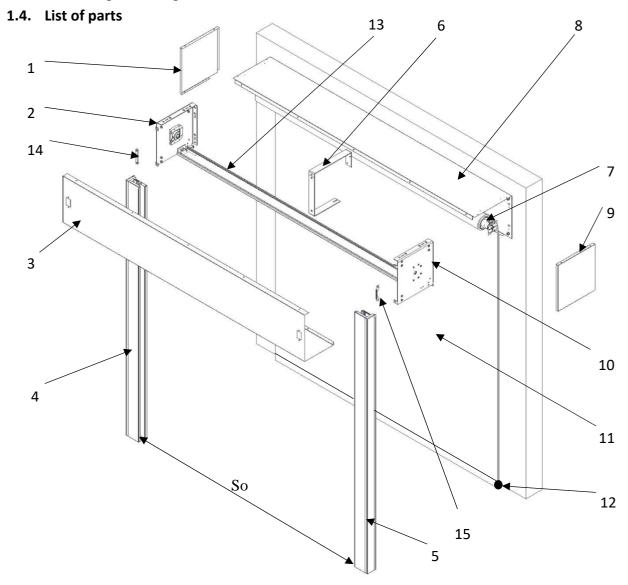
1 – Left-hand fascia cover; 2 – Left-hand shaft bracket; 3 – Front fascia cover; 4 – Left-hand guide rail; 5 – Righthand guide rail; 6 – Middle bracket; 7 – Winding shaft with a tubular motor; 8 – Top fascia cover; 9 – Righthand fascia cover; 10 – Right-hand shaft bracket; 11 – Curtain sheet; 12 – Curtain sheet counterweight; 13 – Retaining slat; 14 – Bearing retaining plate; 15 – Motor mount retaining plate
